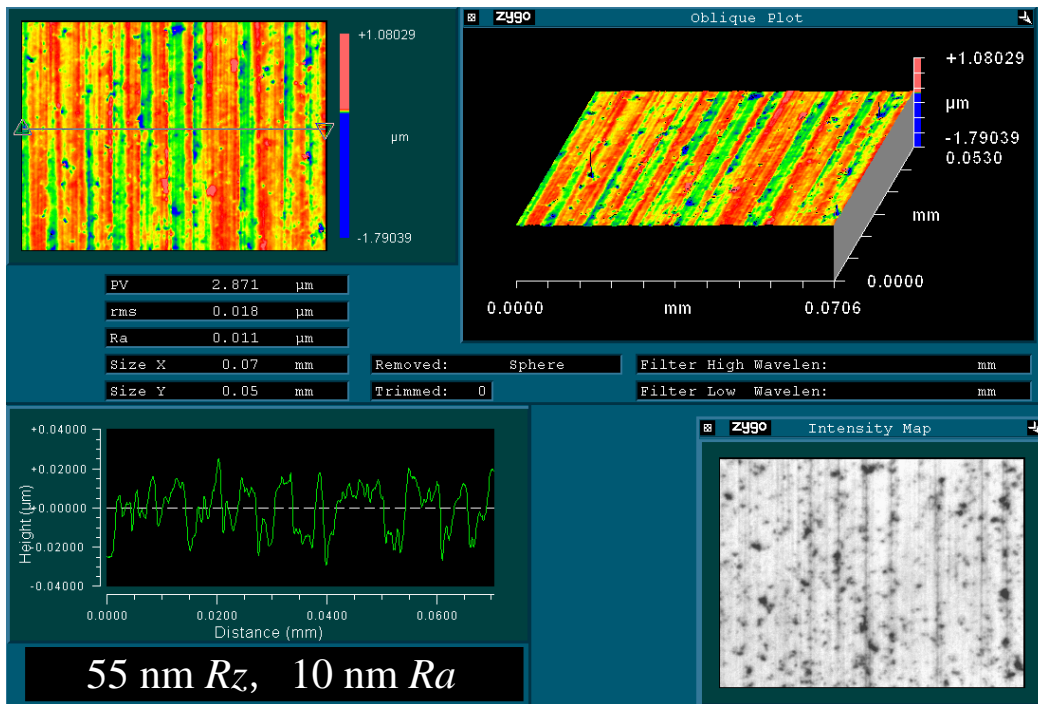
Form deviation profile of machined Fresnel mold.
